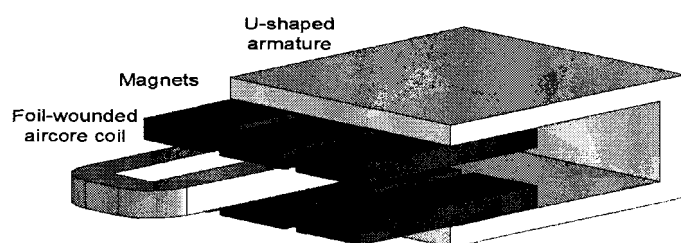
Exploded view of ILLPMA presented in Fig. 1.1.
